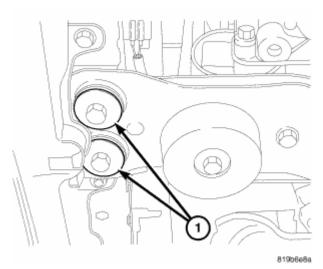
Identifying Front Fore Cross Member Bolts Courtesy of CHRYSLER LLC
